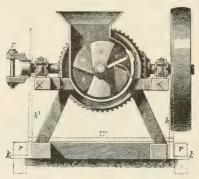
Peat machine of L. Lucht, of Kolberg. Cross-section of Fig. 48.
